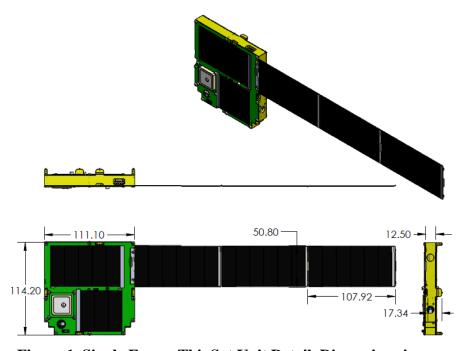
Single Frame ThinSat Unit Detail, Dimensions in mm
